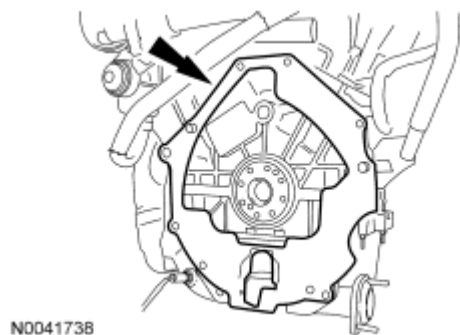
Locating Engine-To-Transaxle Separator Plate
